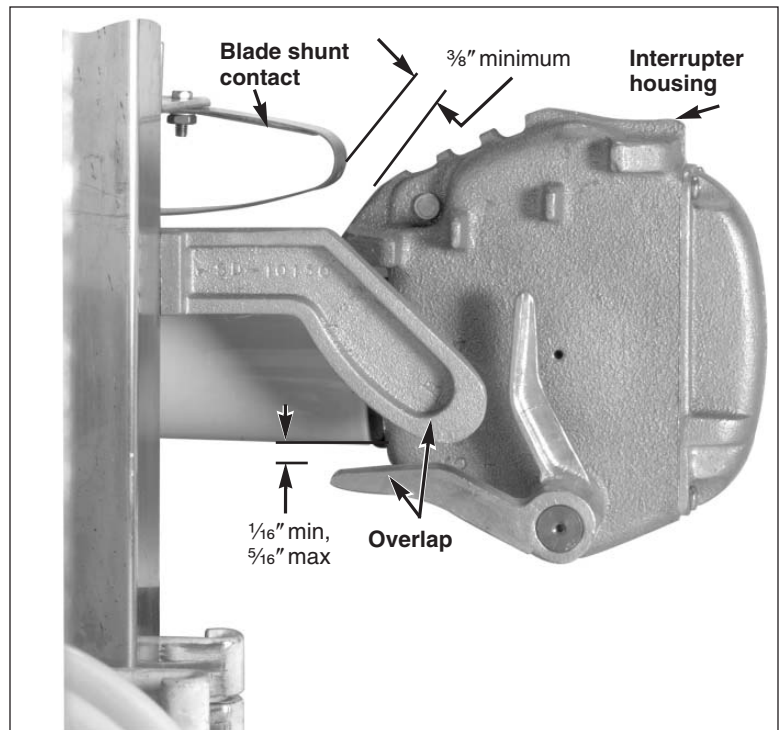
Verifying clearance between blade shunt contact and interrupter housing.
